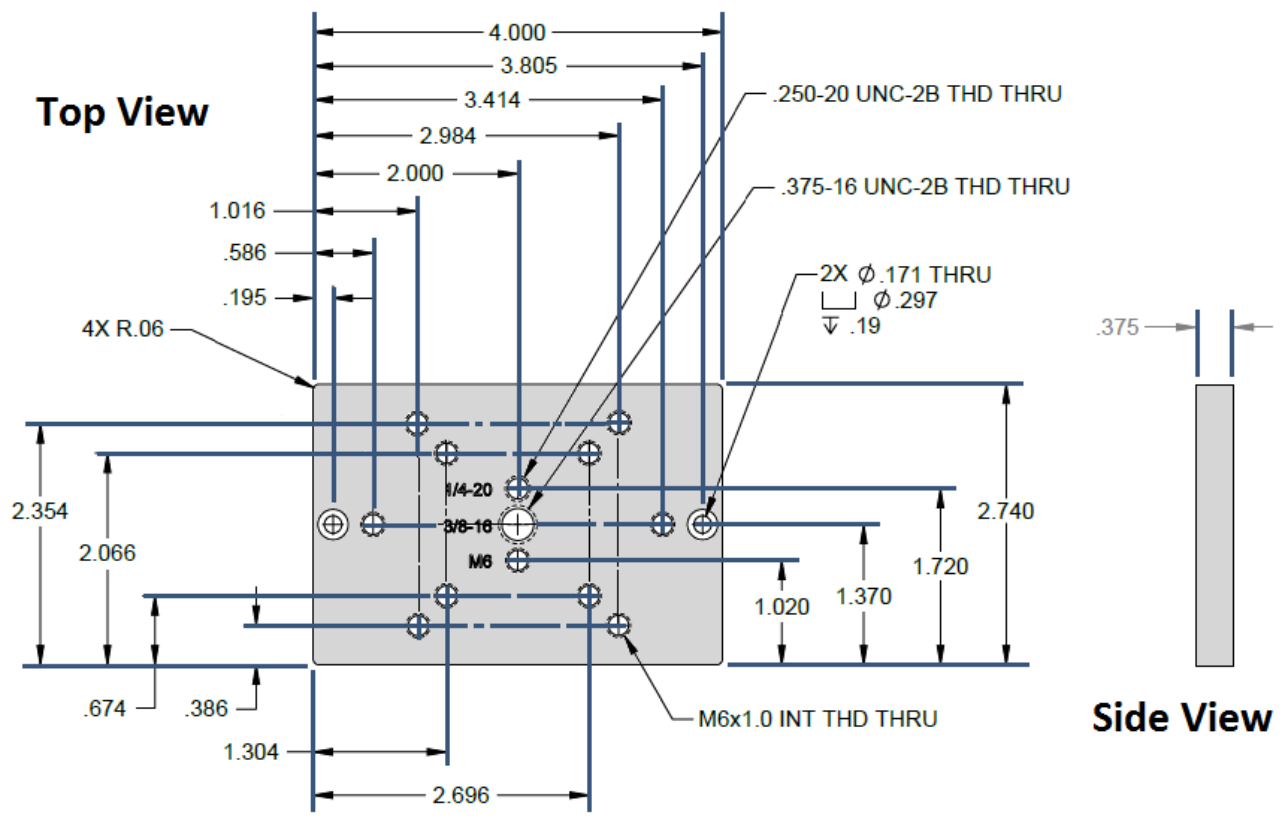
Dimensions – Custom 45-Degrees Base Mounting Plate
